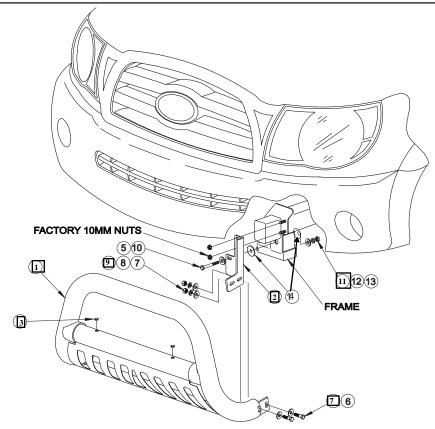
INSTALLATION VIEW OF DRIVER SIDE, PASSENGER SIDE OPPOSITE.
